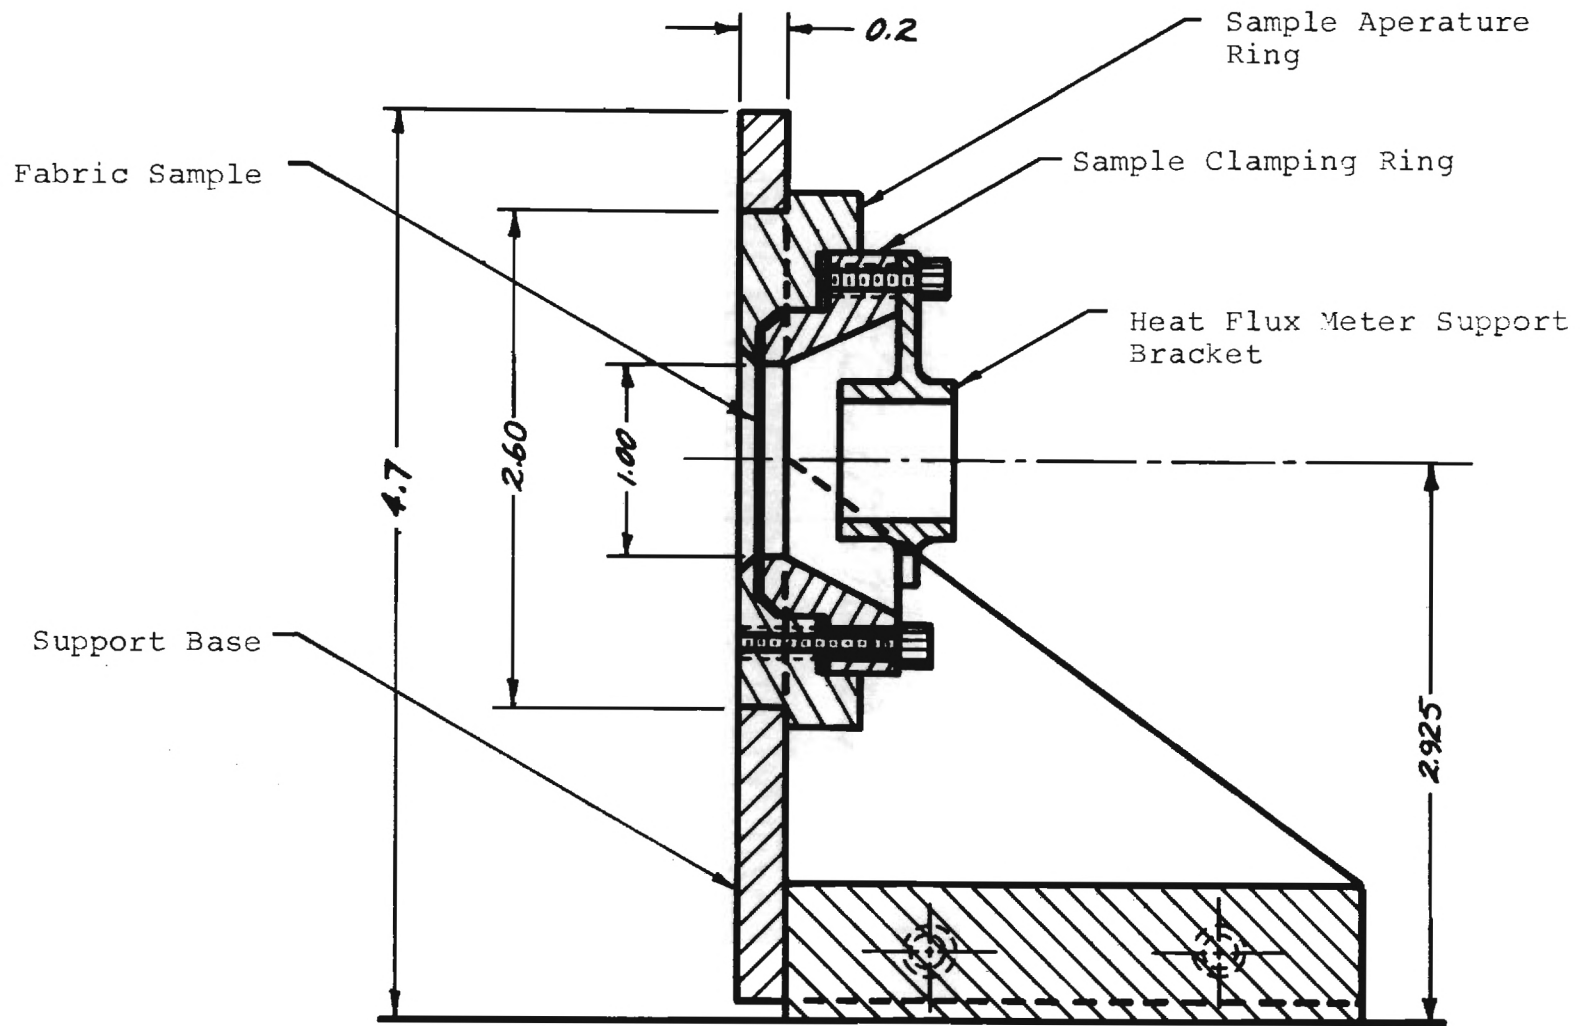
Sample Holder Assembly (Ignition Time Apparatus)
